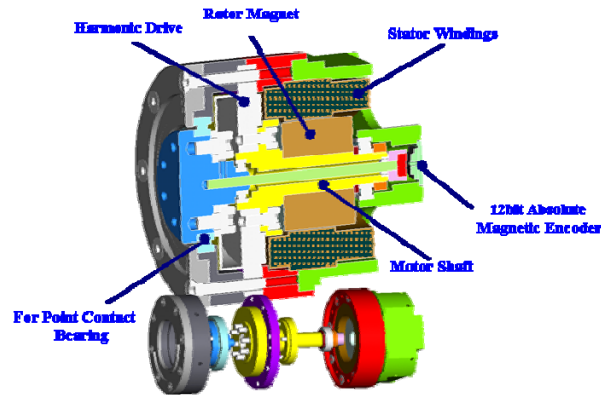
Section of the standard brushless motor group of the iCub. Positioning of the motor and gears can be noted (as indicated). Figure from (Tsagarakis et al., 2007). Note the compact assembly of the frameless motor and harmonic drive gear.
